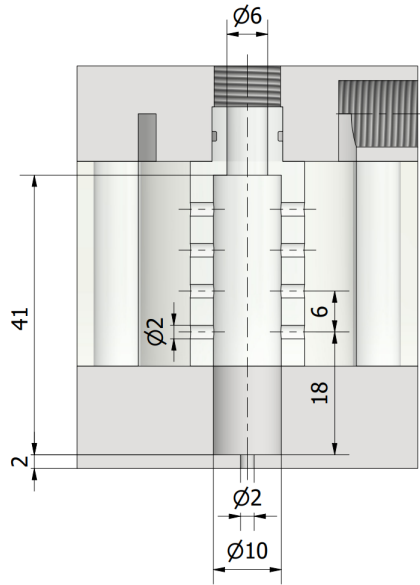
Simulated atomizer geometry (all dimension in millimeters)
